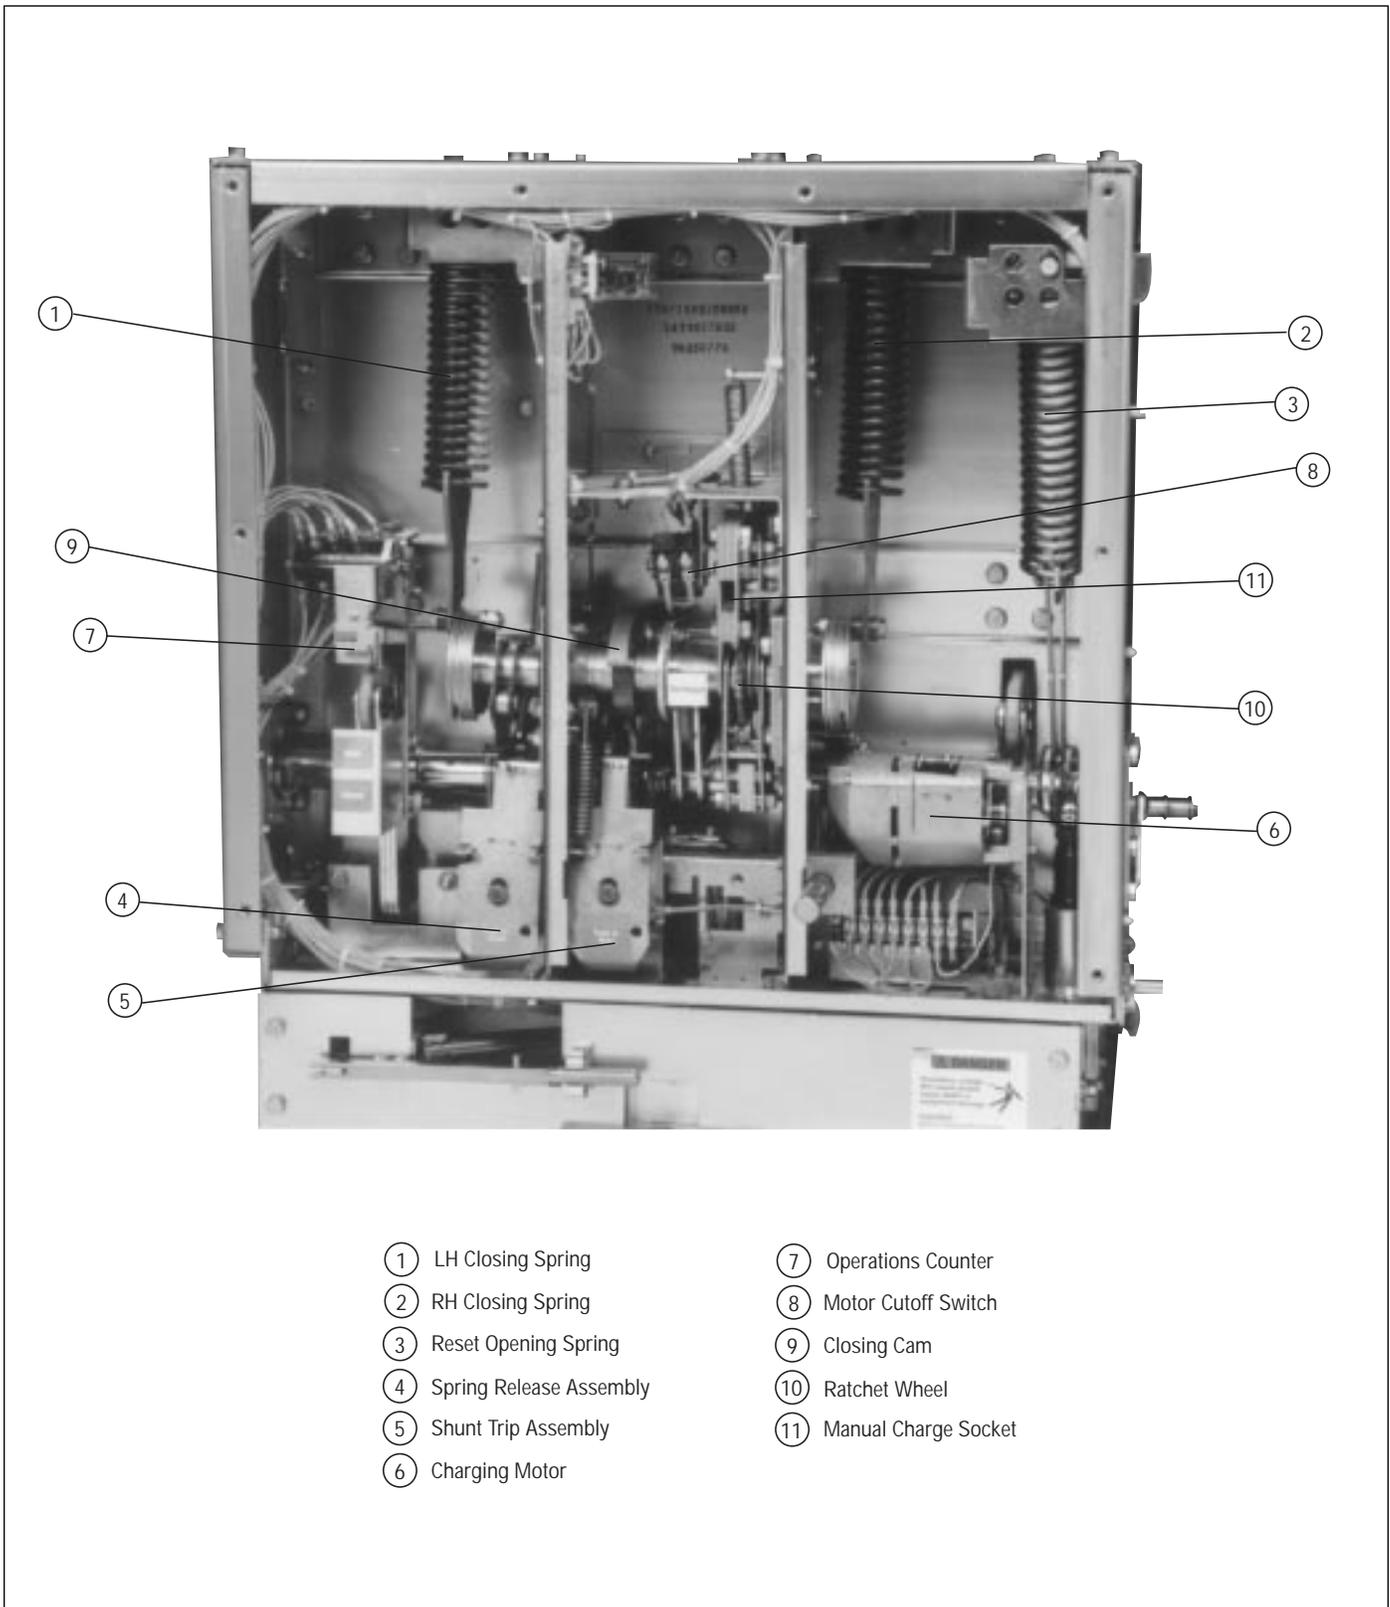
DHP-VR 7.5 or 15 kV Design - Front Faceplate Removed
